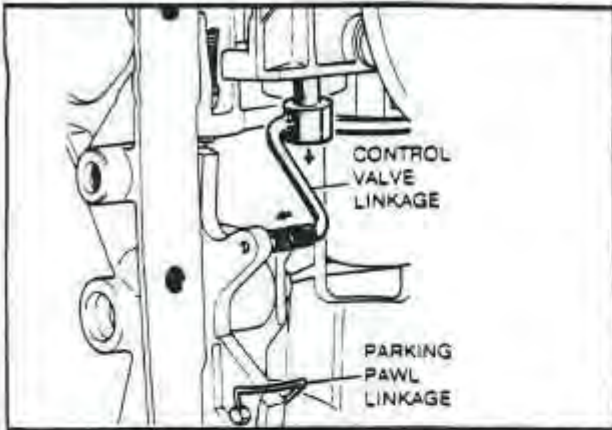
MANUAL CONTROL VALVE AND PARKING PAWL LINKAGE
